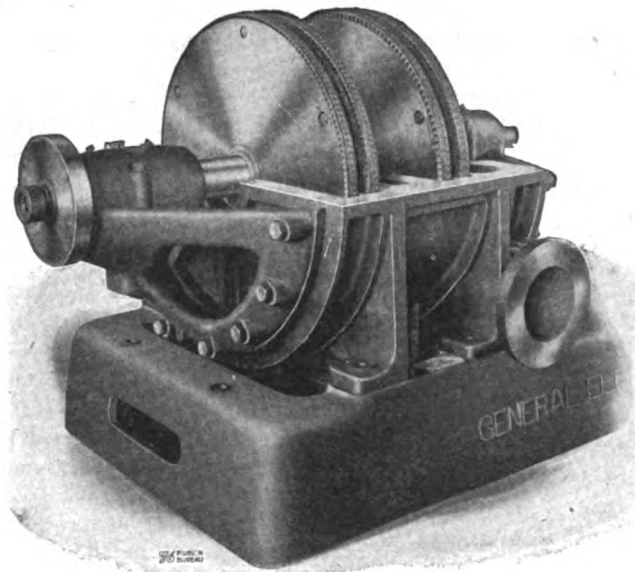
75 K. W. TURBINE WHEELS ASSEMBLED IN WHEEL CASING, UPPER HALF REMOVED.
